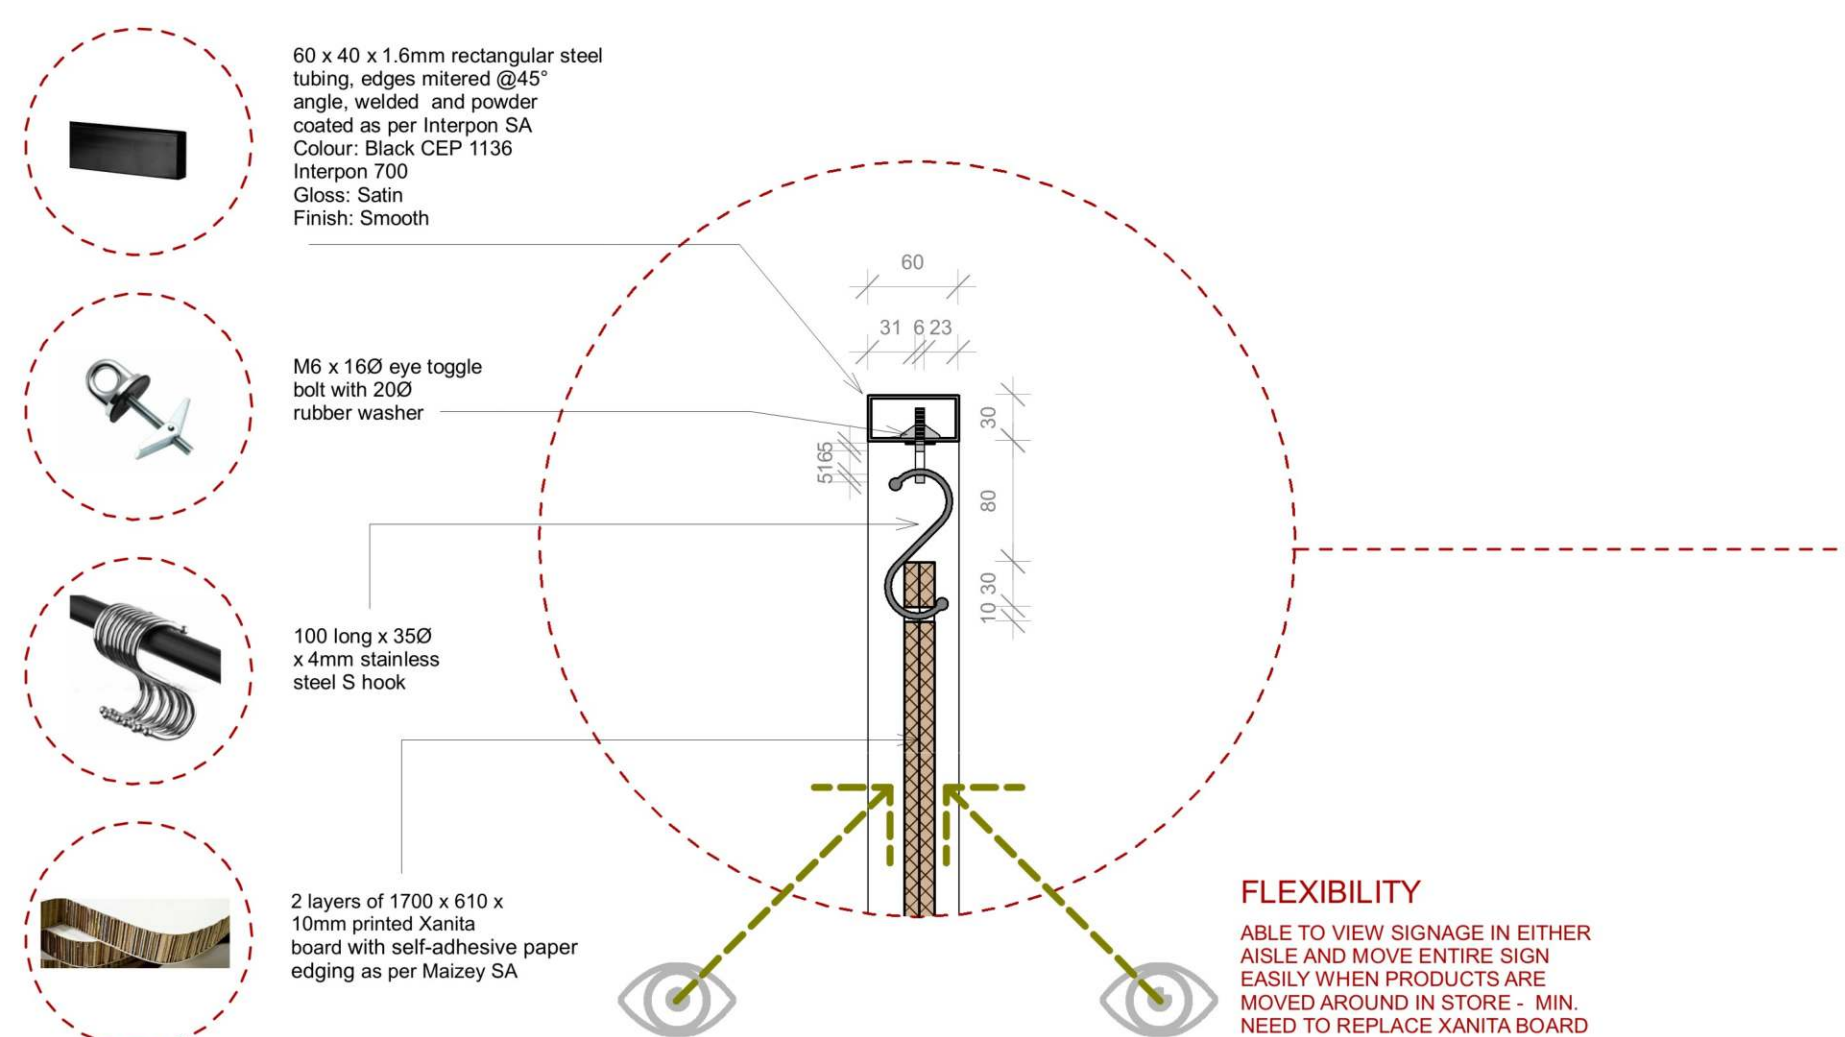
AISLE MARKER [JOINT INSTRUCTIONS]
